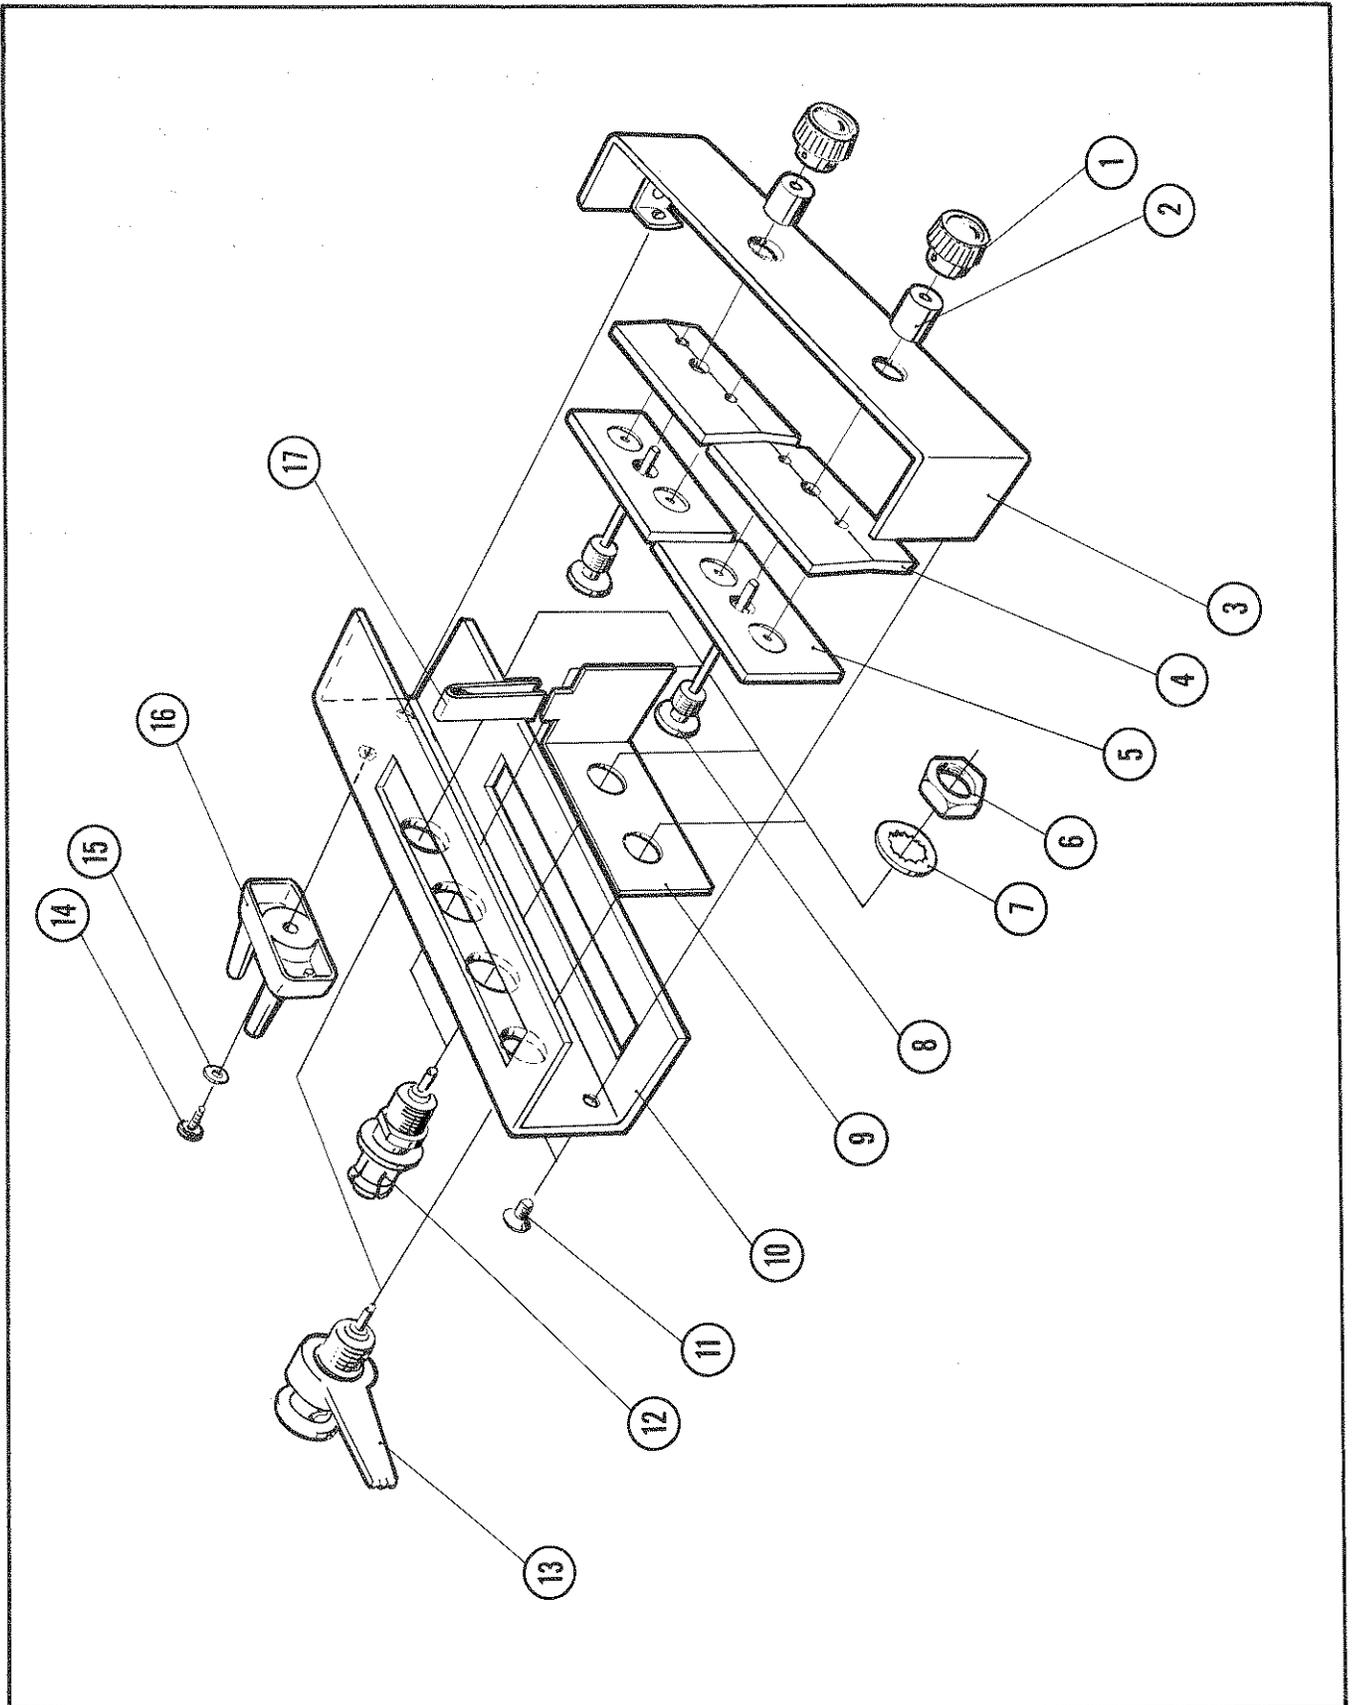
Parts Identification for 16047C (Sheet 1 of 2).
